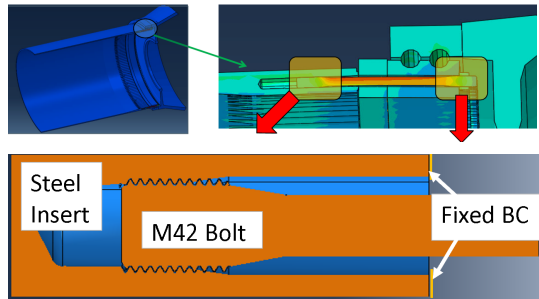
A half section of blade root model and cross section view of bolted joint connection
